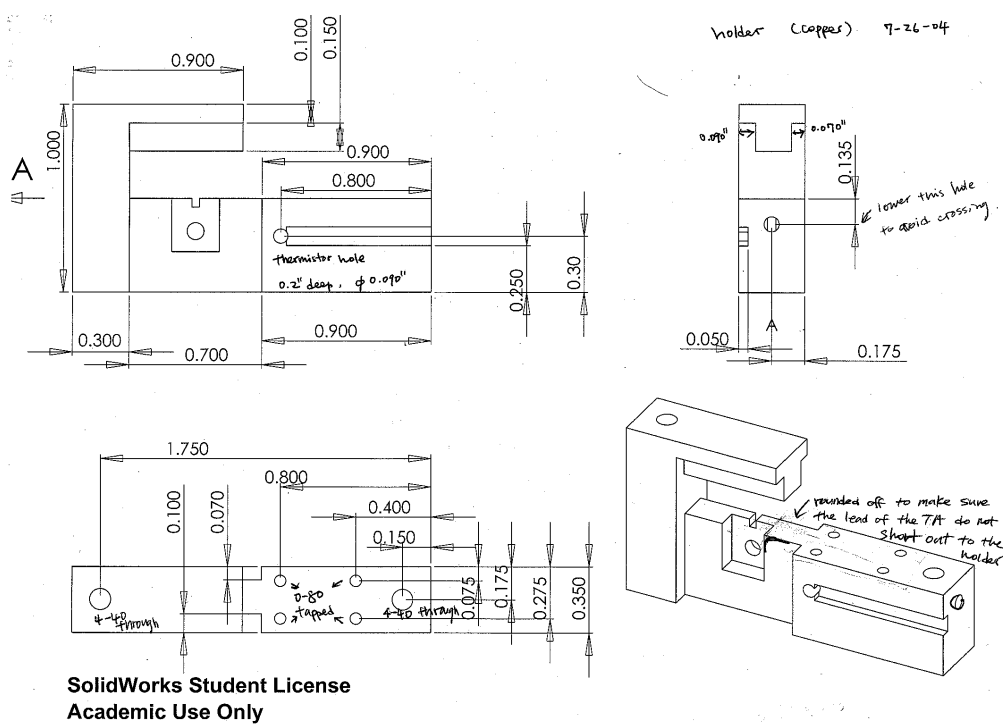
Detailed dimensions of the TA holder in inches. The “arm”-like structure is to prevent dust falling onto the TA chip and the lens holder touching the chip. This part can be removed.
